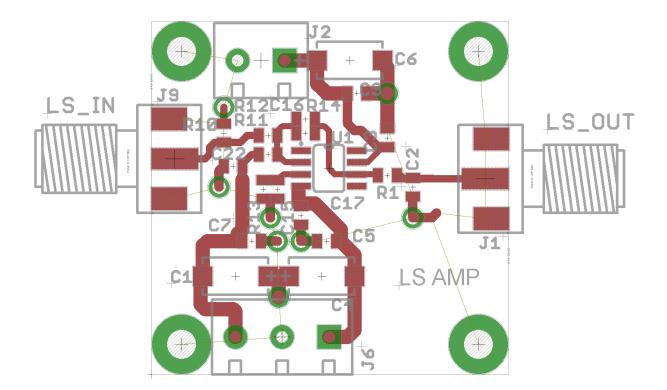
Printed Circuit Board Layout for Level Shifter Amplifier
